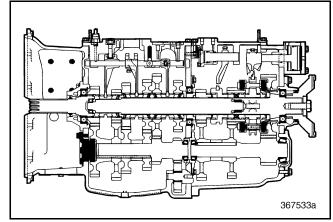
Front Countershaft Front Bearing Cover Component Locator (T313L/T318L Shown)
